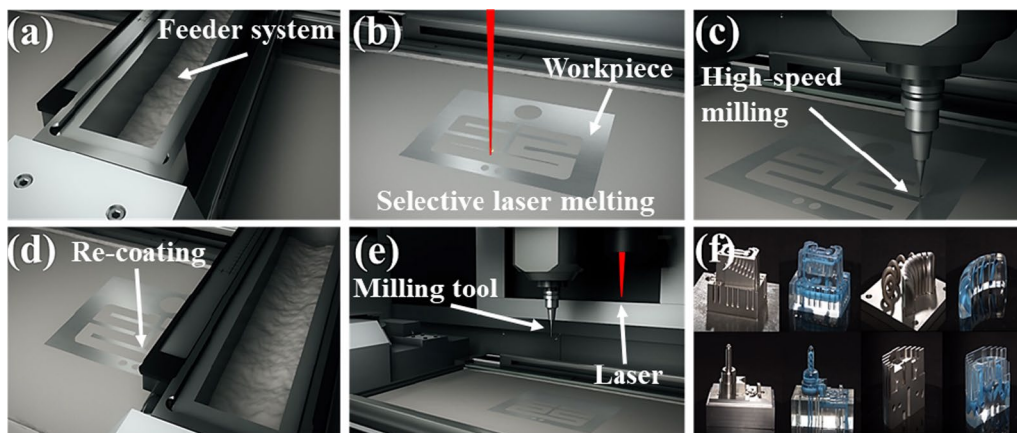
SLM/HSM hybrid manufacturing process [14]: a Feeder system; b Selective laser melting process; c High-speed milling process; d Re-coating; e SLM/HSM hybrid manufacturing; f Sample parts with complex inner passages and external profiles
